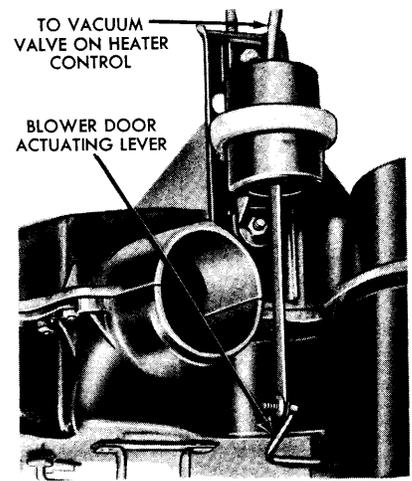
Blower Door Vacuum Solenoid Adjustment
